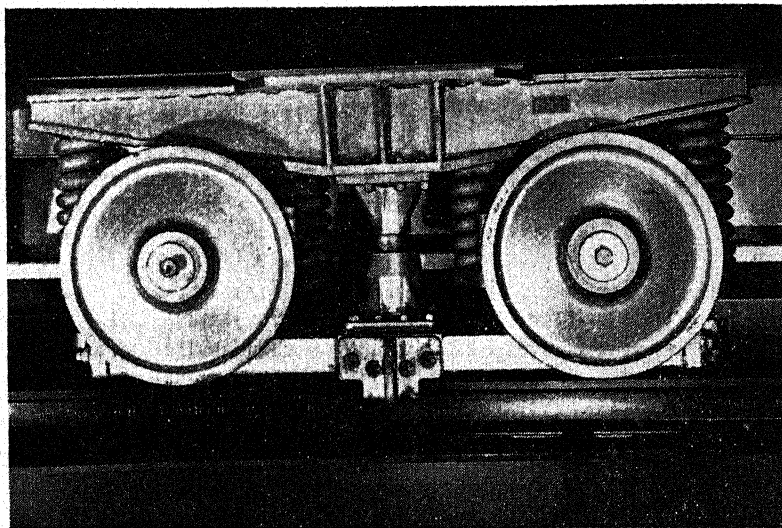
One of 32 arc welded trucks which carry 2,000,000-pound dome.
